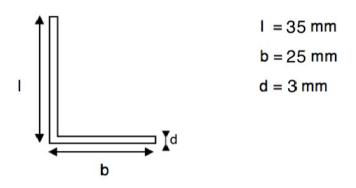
Dimensions of the aluminum fins 'L' section (8)
